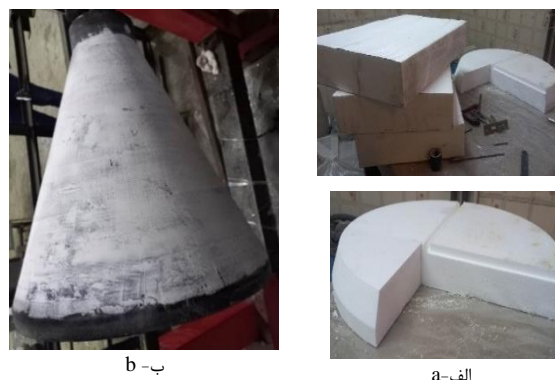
(a) Several cutting block and (b) fabrication of truncated conical foam mold
